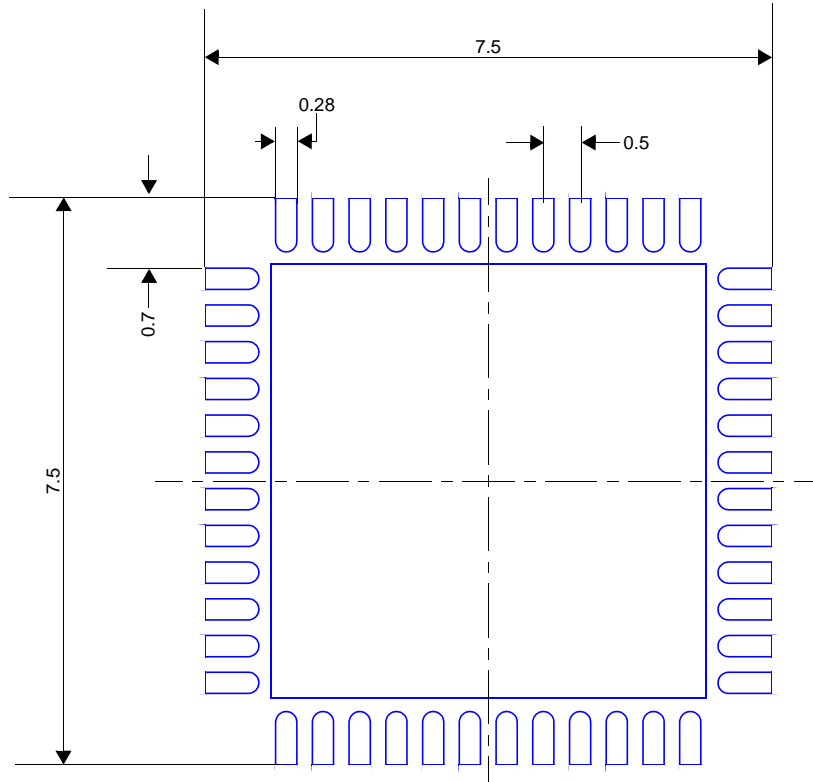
Package VFQFPN2-48 recommended footprint dimensions
